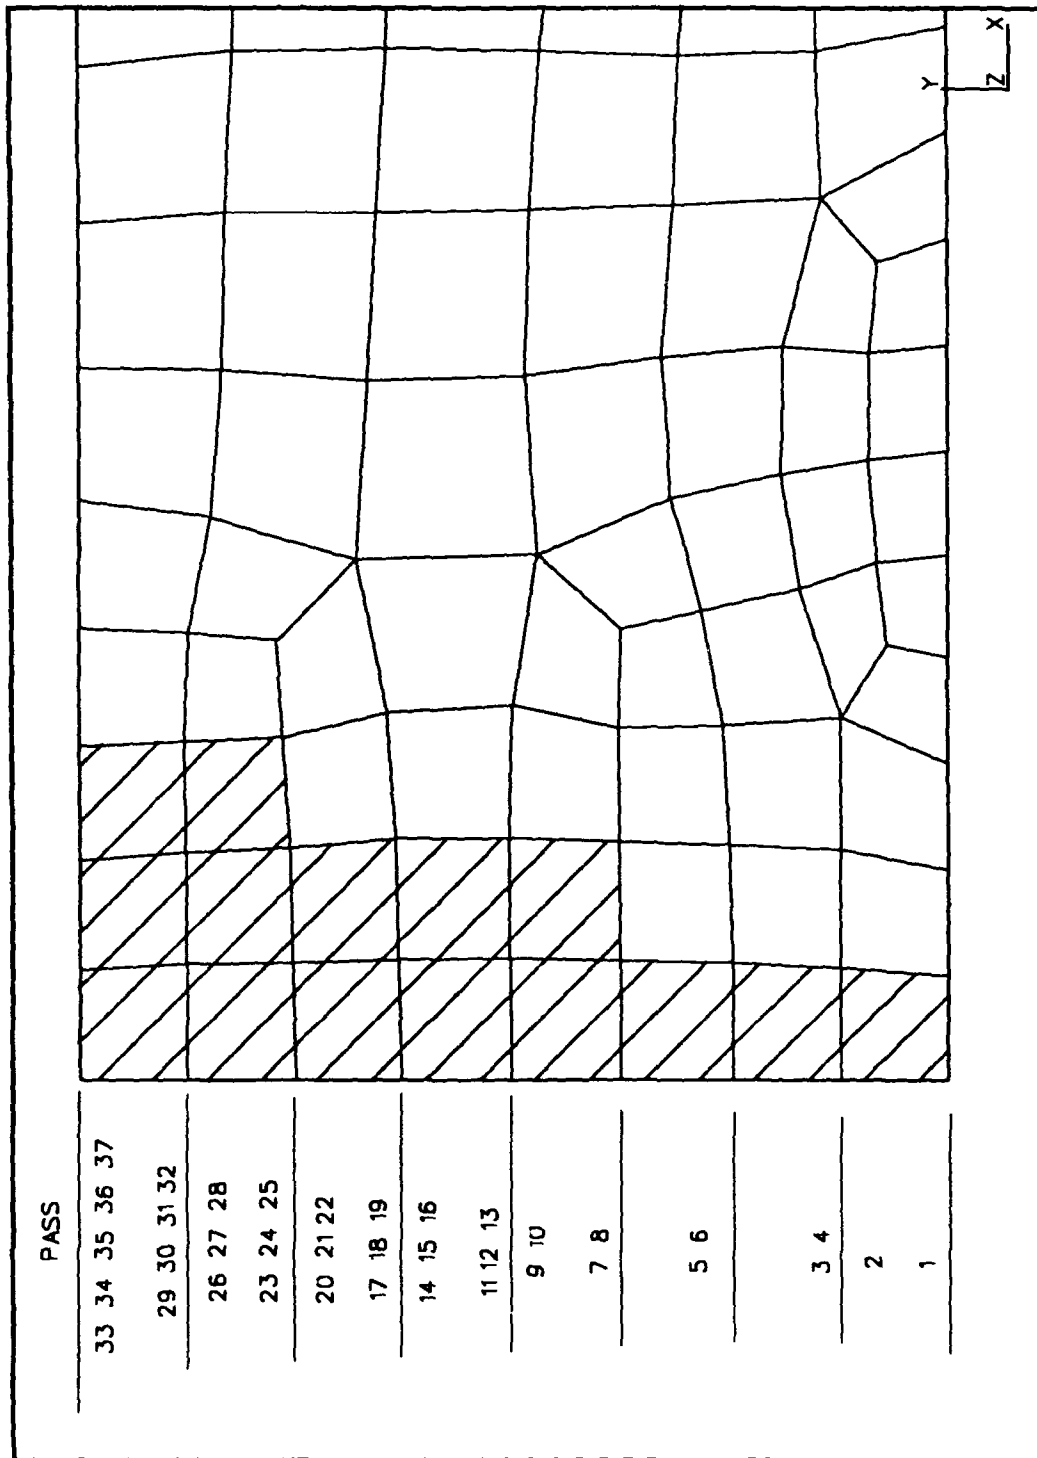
Lumped passes for flange weld (FACW: single-V-groove)
